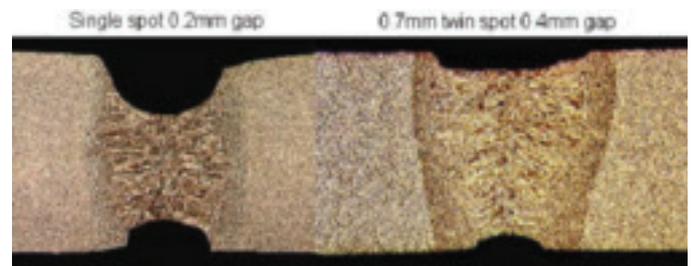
Transverse sections of a single spot laser weld with a 0.2-mm horizontal gap (left) and a 0.7-mm twin spot laser weld with a 0.4-mm horizontal gap (right) produced on the Miebach during online trials.
